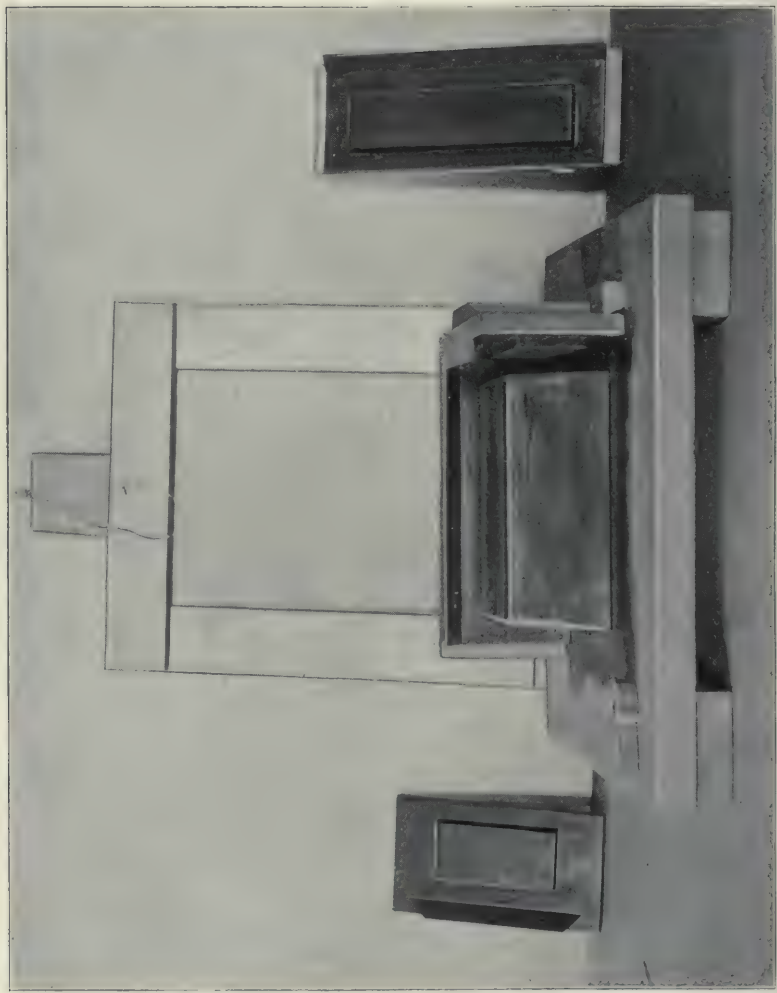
FORM FOR FLOWER BOX WITH SIDE AND END REMOVED. THE SAME FRAME IS SHOWN ASSEMBLED IN FIG. 2.
